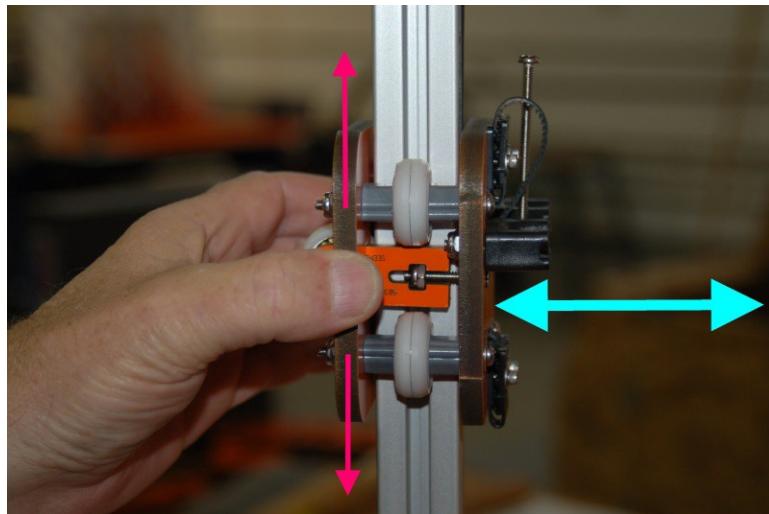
Testing the Cheapskate for proper bearing tension.
